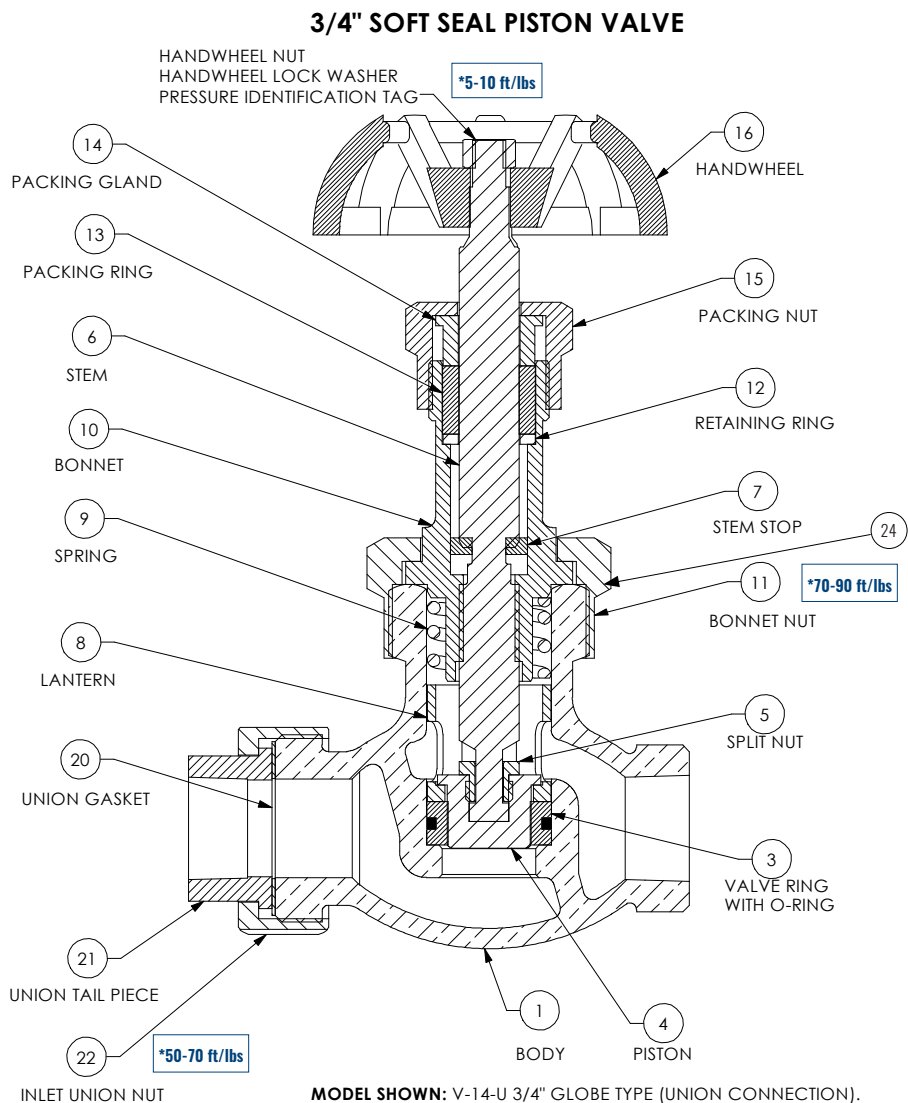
Spring to be installed in back of piston Large I.D. facing up
